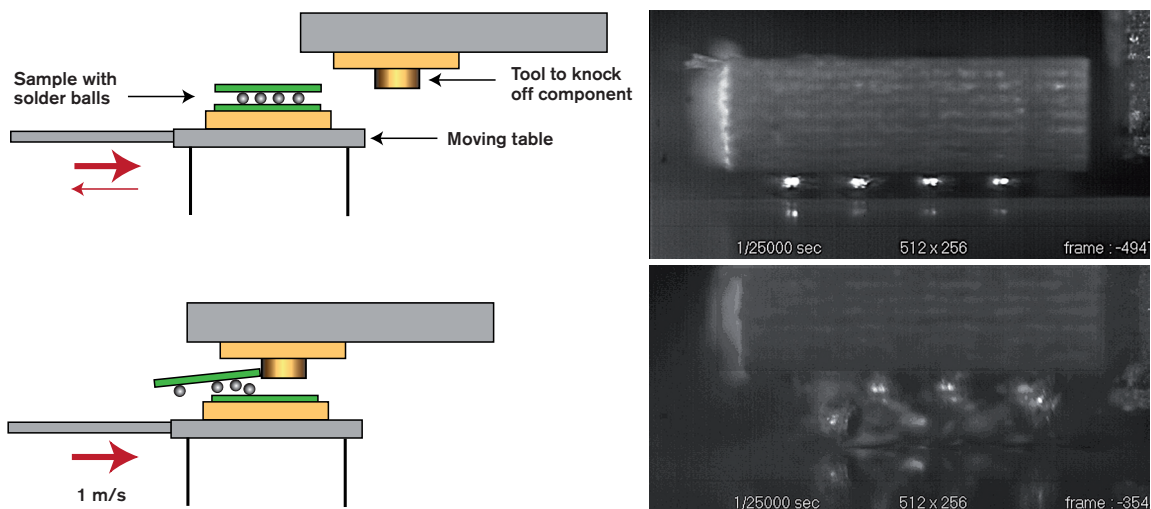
Shearing of components with a unique test method developed to test the risk of brittle fractures in solder joints.
